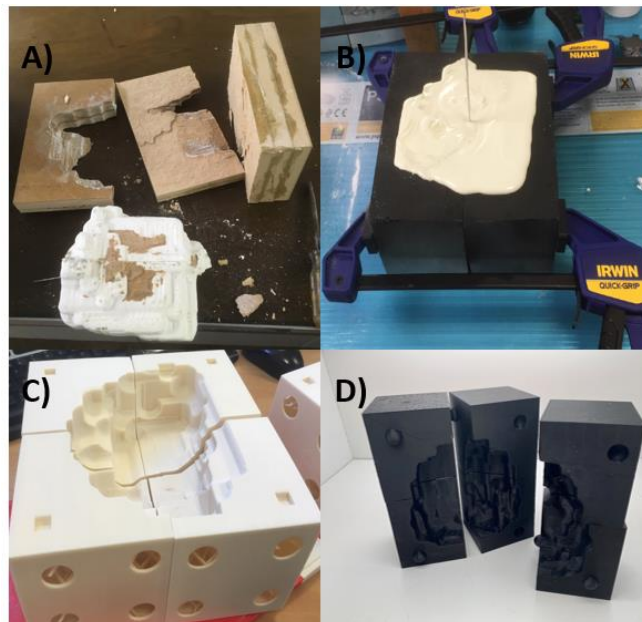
, Pictures of the moulds, A) CNC MDF, B) CNC rigid foam, C) SLS Nylon D), and 3D print PLA
